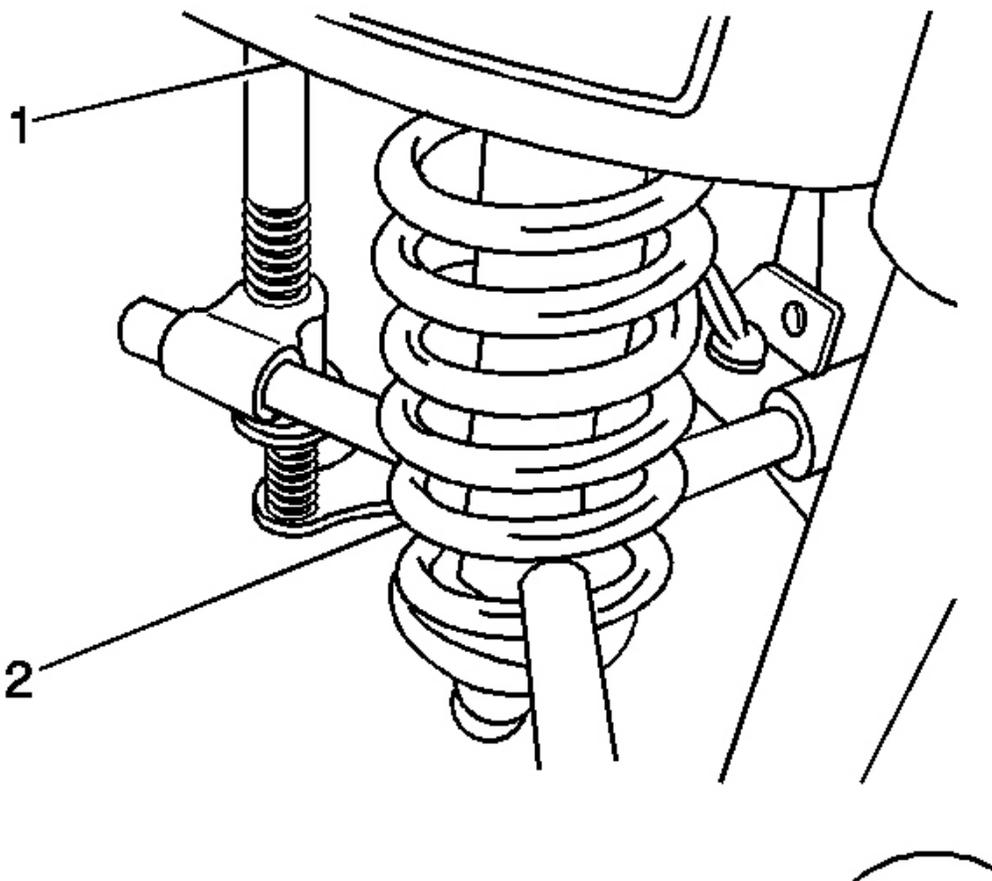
Compressing/Releasing Lower Part Of Shock Spring
